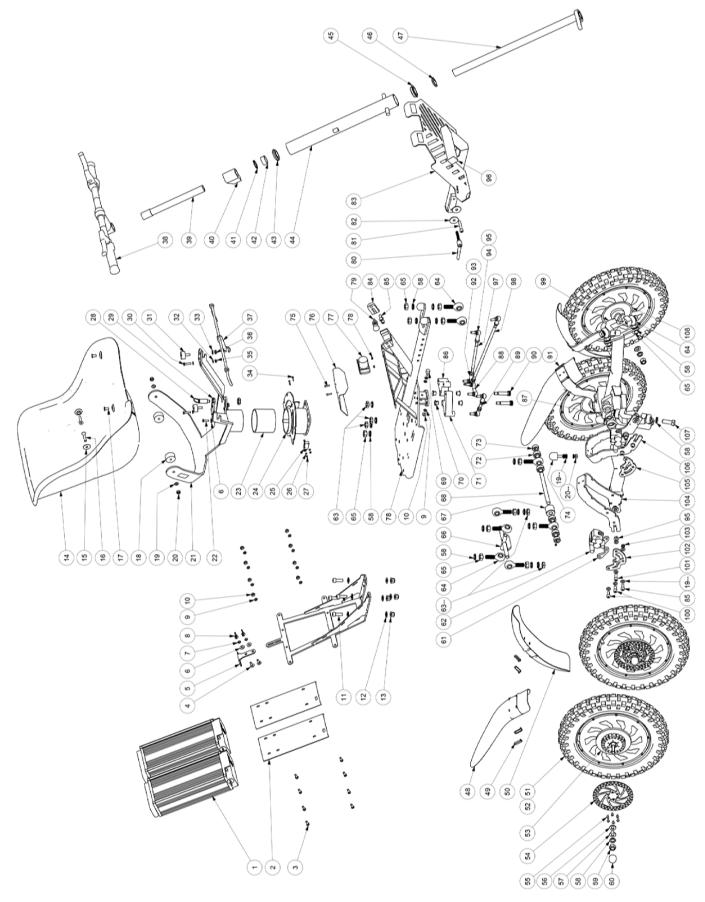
Exploded view of ZOOM with swivel seat.
